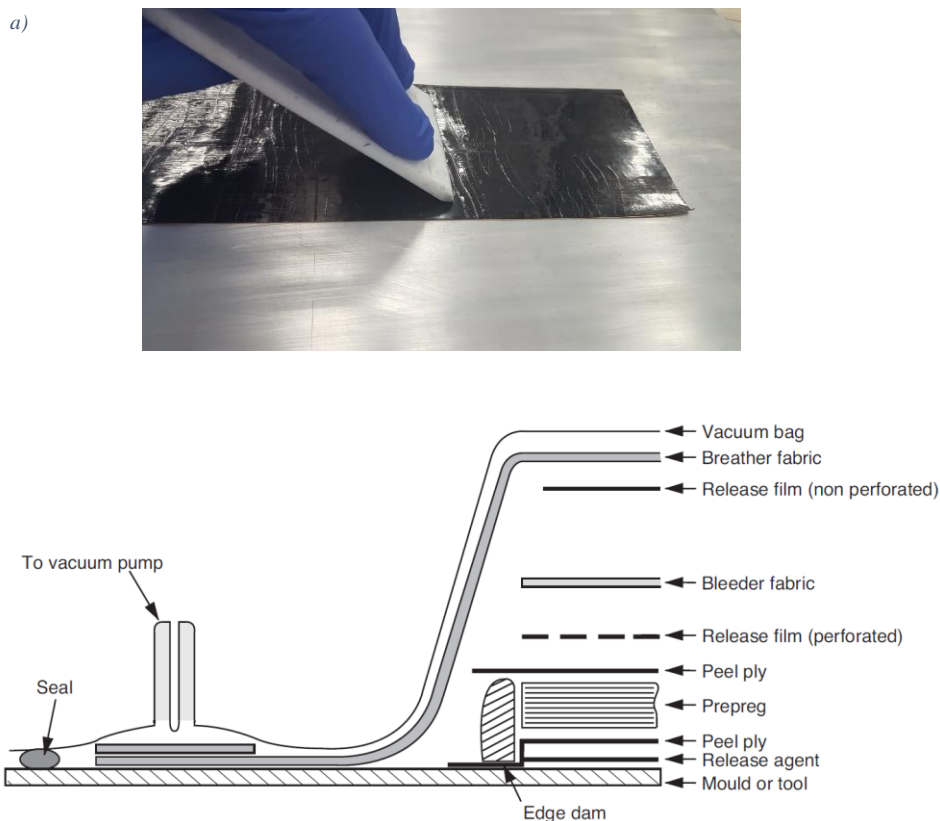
a) Dibber tool for air removal and b) vacuum bag set-up (figure from [14])
